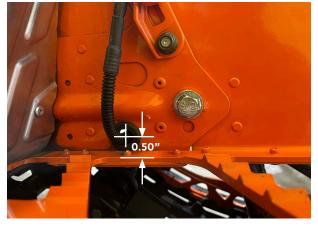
A: MY24 and older: Second mark for drilled hole Fig. 4B: MY25 and newer: Second mark for drilled hole
